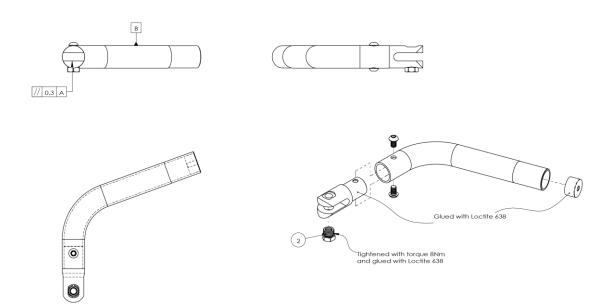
Exploded Drawing for Right Adjustment Arm Mechanism
